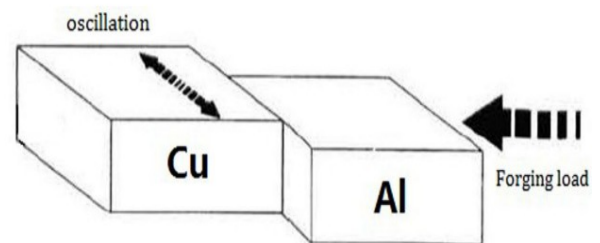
Schematic illustration of the linear friction welding process [22]
